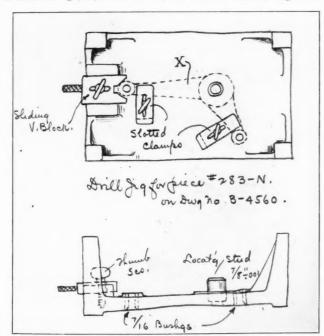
Sketch of a Simple Drill Jig for a Bell-crank
